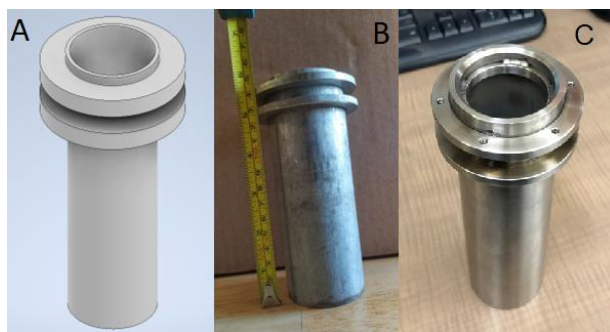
Stainless steel vessel for the electrochemical reactor. A) shows an image of the vessel design, B) shows the vessel being manufactured, and C) shows the final vessel after polishing, drilling, and welding. It is shown that the vessel is made of a stainless steel tube with a uniform diameter surrounded by two larger diameter stainless steel flanges on the top. There is a gap between the two flanges, which is designed to allow vessel removal (using tongs) from the furnace if necessary.
